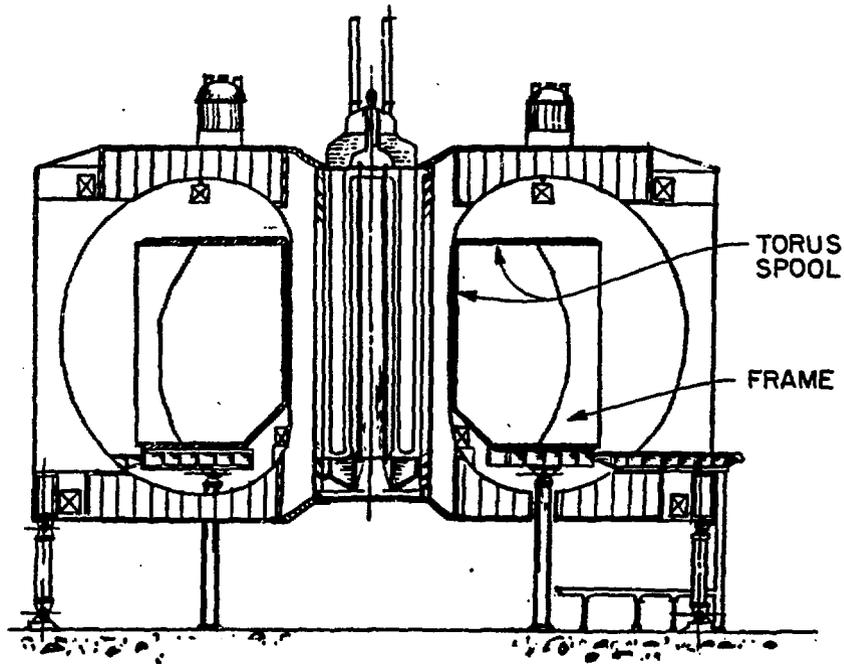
Initial assembly of the FED device - installation of torus spool and frame structure.
